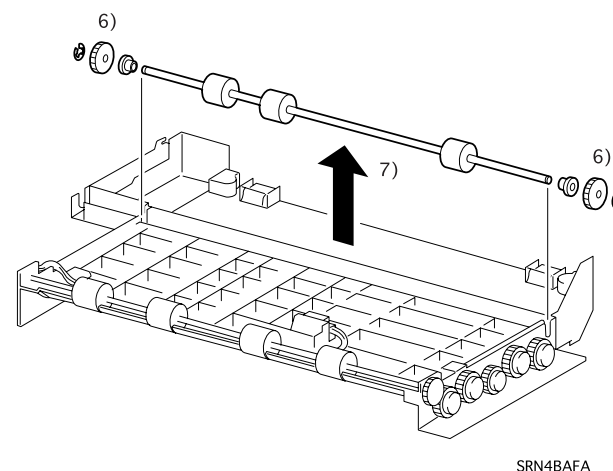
Figure 3-94. EXIT UPPER ASSEMBLY Removal
